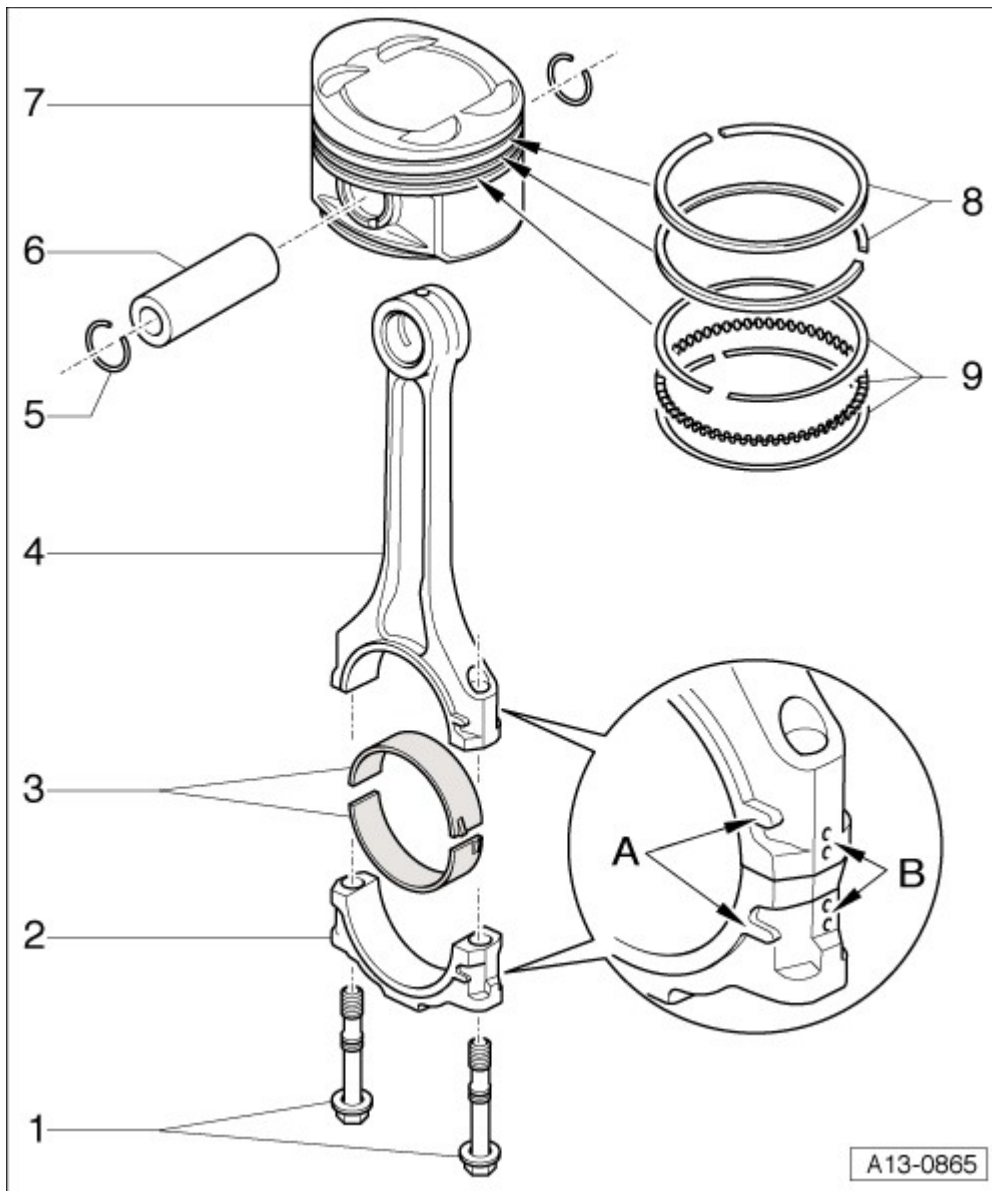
Identifying Piston And Connecting Rod, Component Overview
